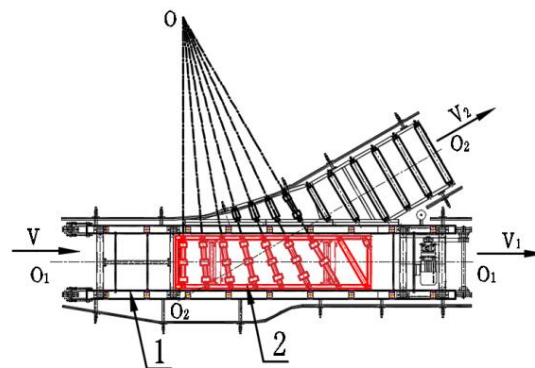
Baggage diversion process.1 Conveyor belt, 2 Lifting mechanism
